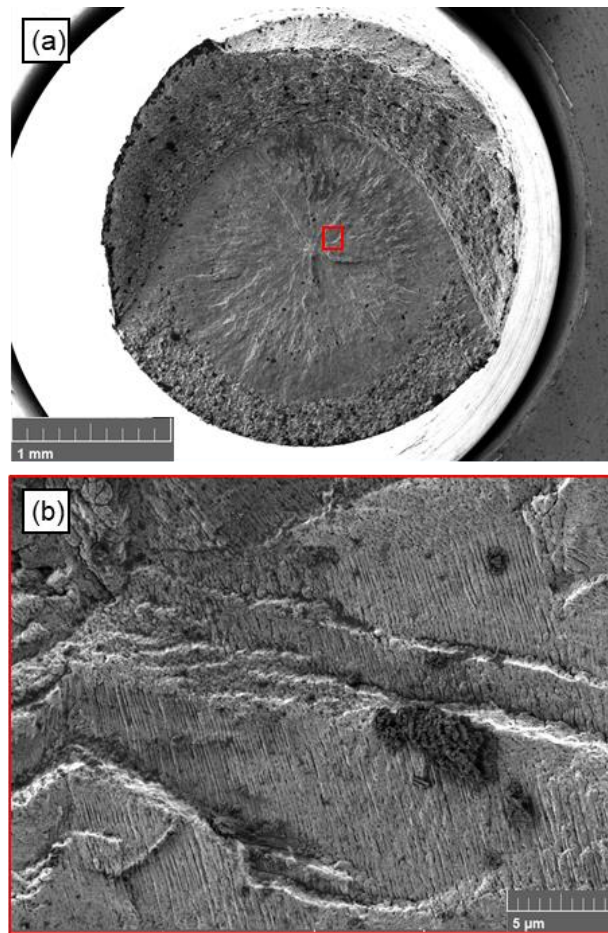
SE fracture surface images of wrought Inconel 718 specimen tested at $\sigma_a = 550$ MPa with a corresponding fatigue life of $2N_f = 5.94 \times 10^7$ reversals. The overall fracture surface in (a) shows a single, internal crack initiation site with (b) trans-granular crack growth showing fine fatigue striations.
